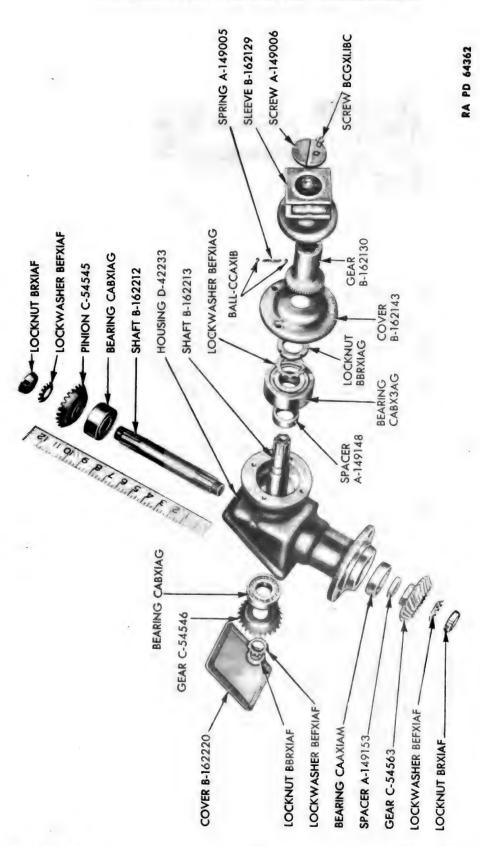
Elevating Mechanism Upper Assembly—Exploded View
